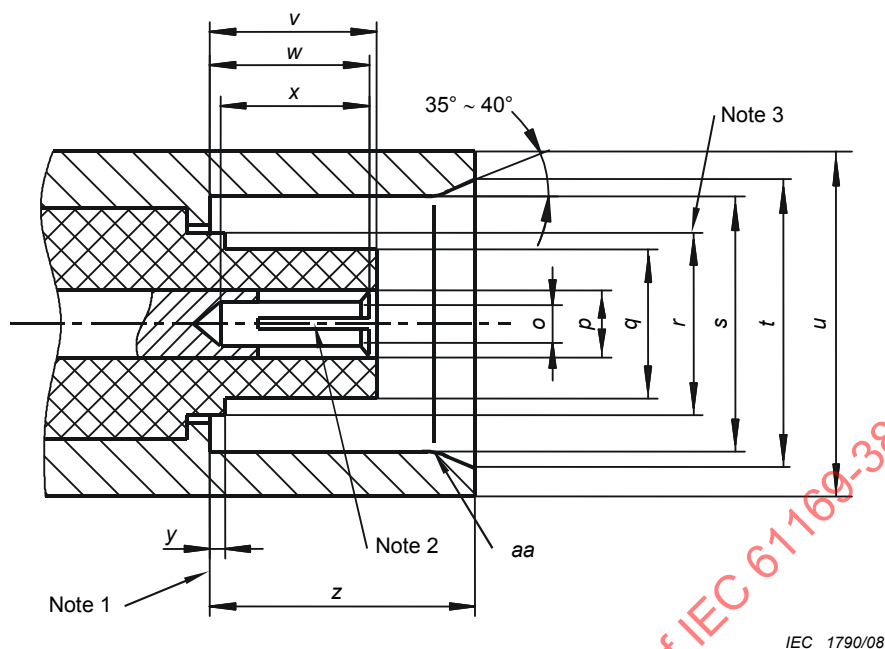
Connector with socket-centre contact (for dimensions, see Table 2)
